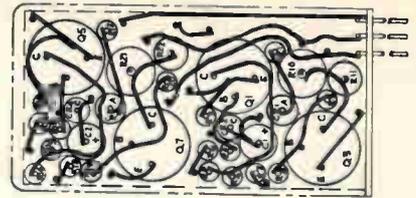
Circuit interconnections are indicated on the wafer board with photographic techniques. Actual connections are welded.
